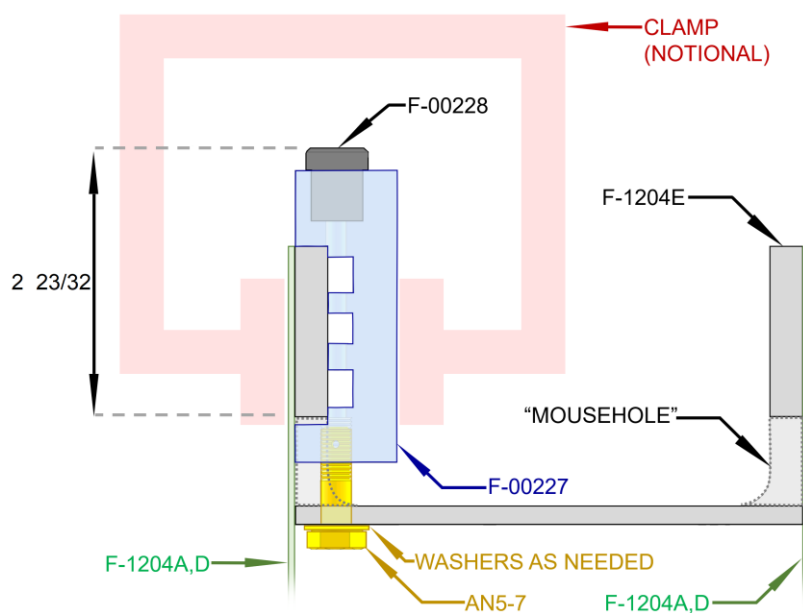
CROSS-SECTION SHOWING LOCATION OF F-00227 AND F-00228
